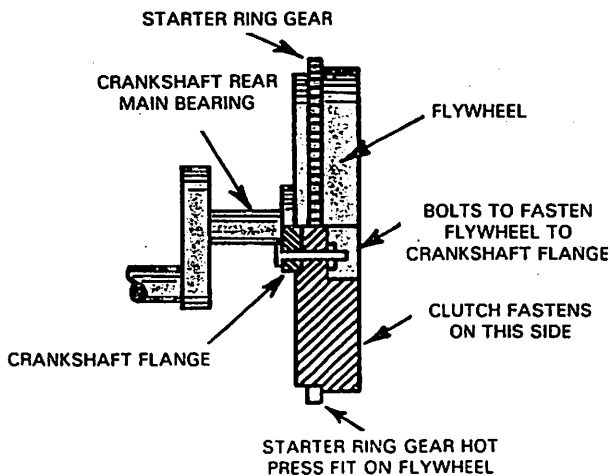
Heavy flywheel is bolted to the crankshaft flange.
